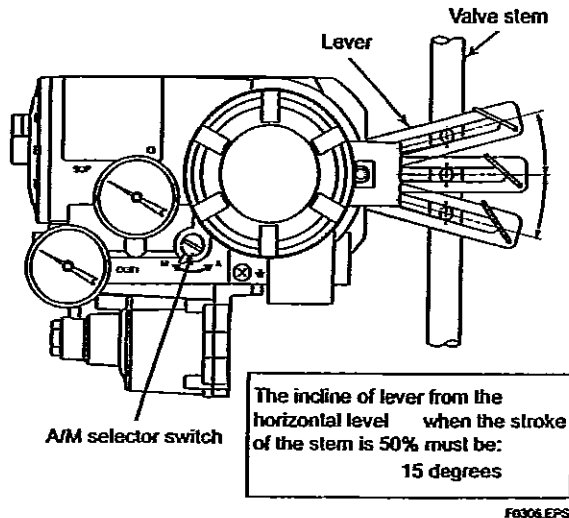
Checking Position at Which Clamp Should Be Fixed
